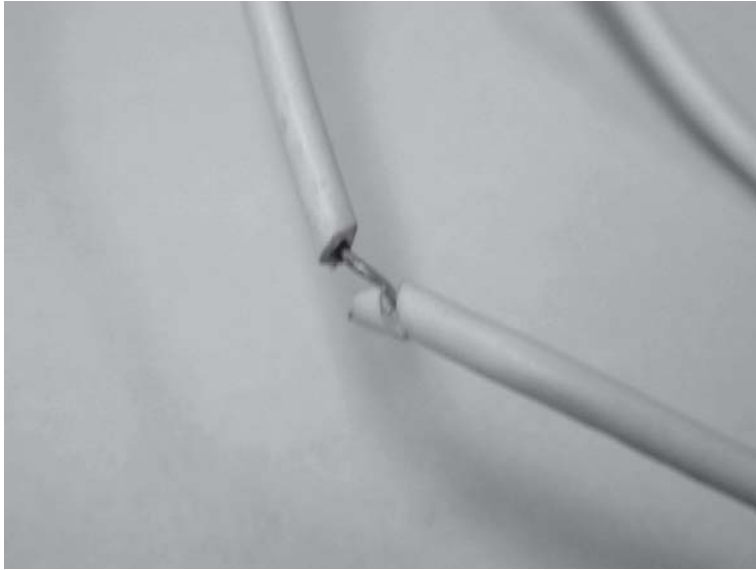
Cracking of polyethylene wire insulation (close-up view)
